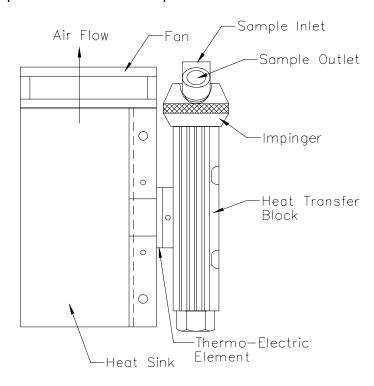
Heat Exchanger, Impinger and Heat Sink Assembly
